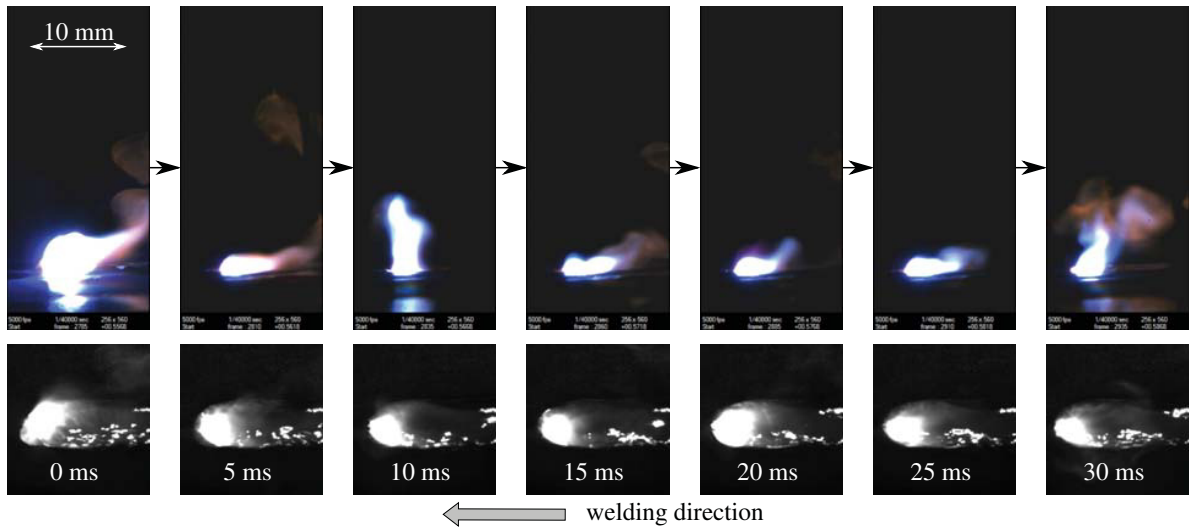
High-speed image of the welding test with 50 l/min inert gas. Welding parameters: laser power 17.6 kW, focus -8 mm, welding speed 1.8 m/min, shielding gas Argon. Top: vapor plume. Bottom: weld pool.
